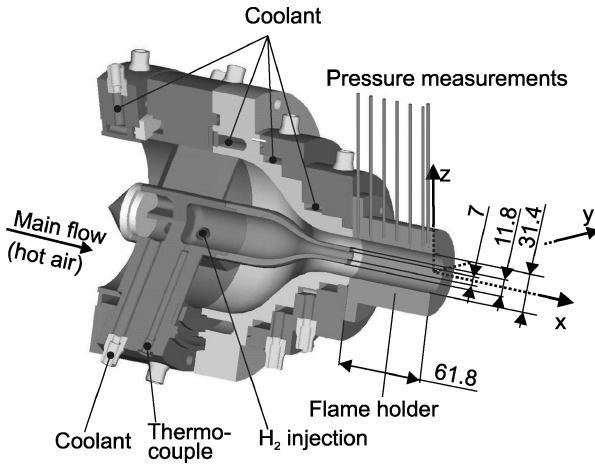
Cut-away of supersonic nozzle (all dimensions in millimeters).
